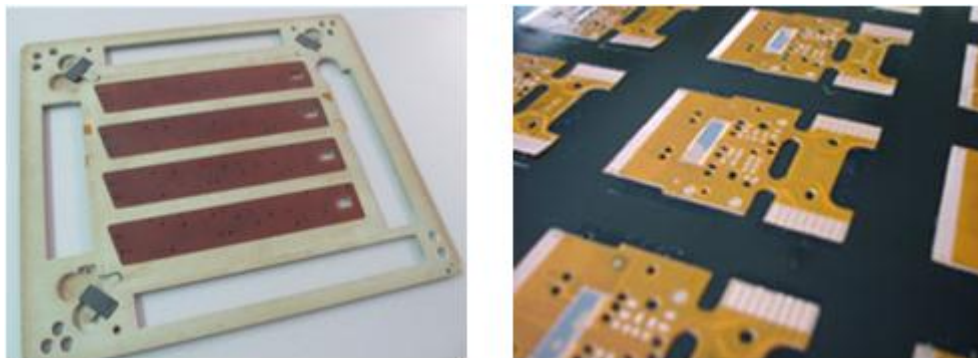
example of flexible PCBs mounted on adhesive fixtures
